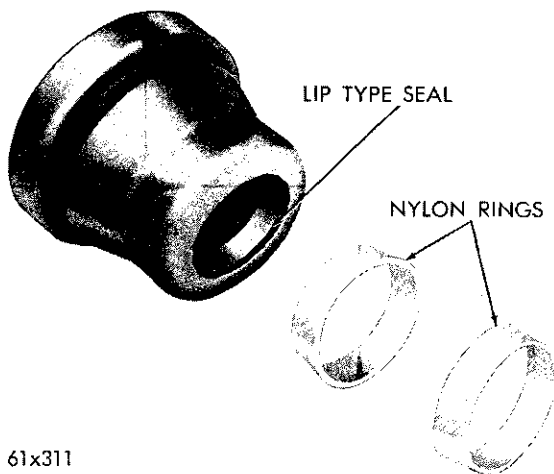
Nylon Rings and Lip Type Seal (Exploded View)
